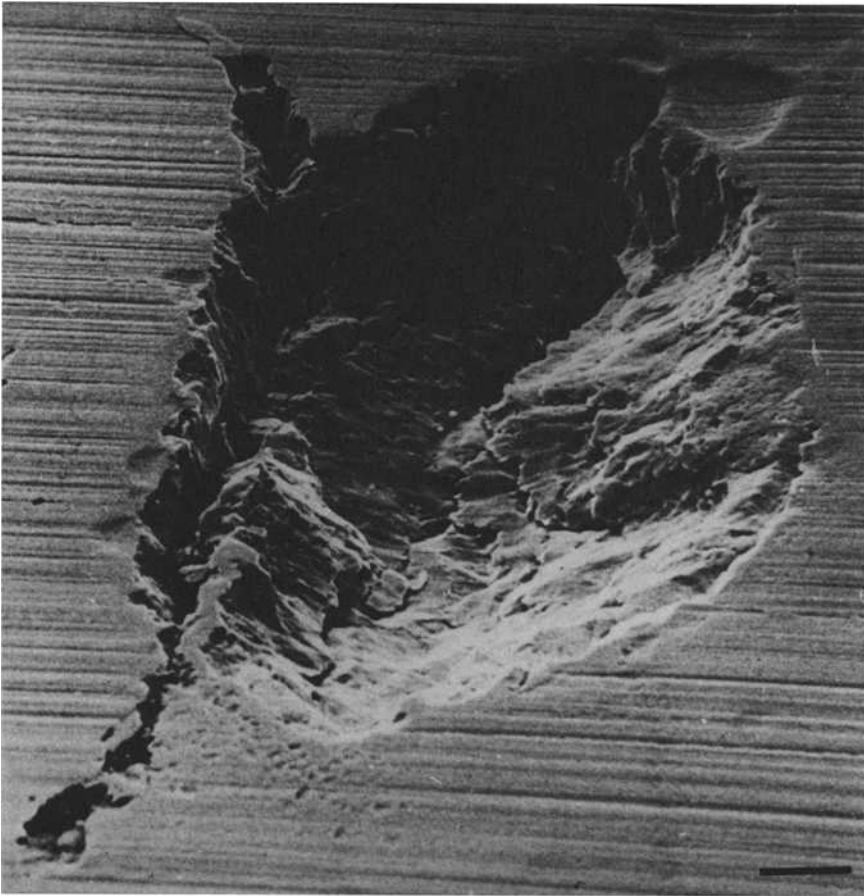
A typical rolling contact fatigue pit in the surface of a tested flat washer (marker is 20 μm).
